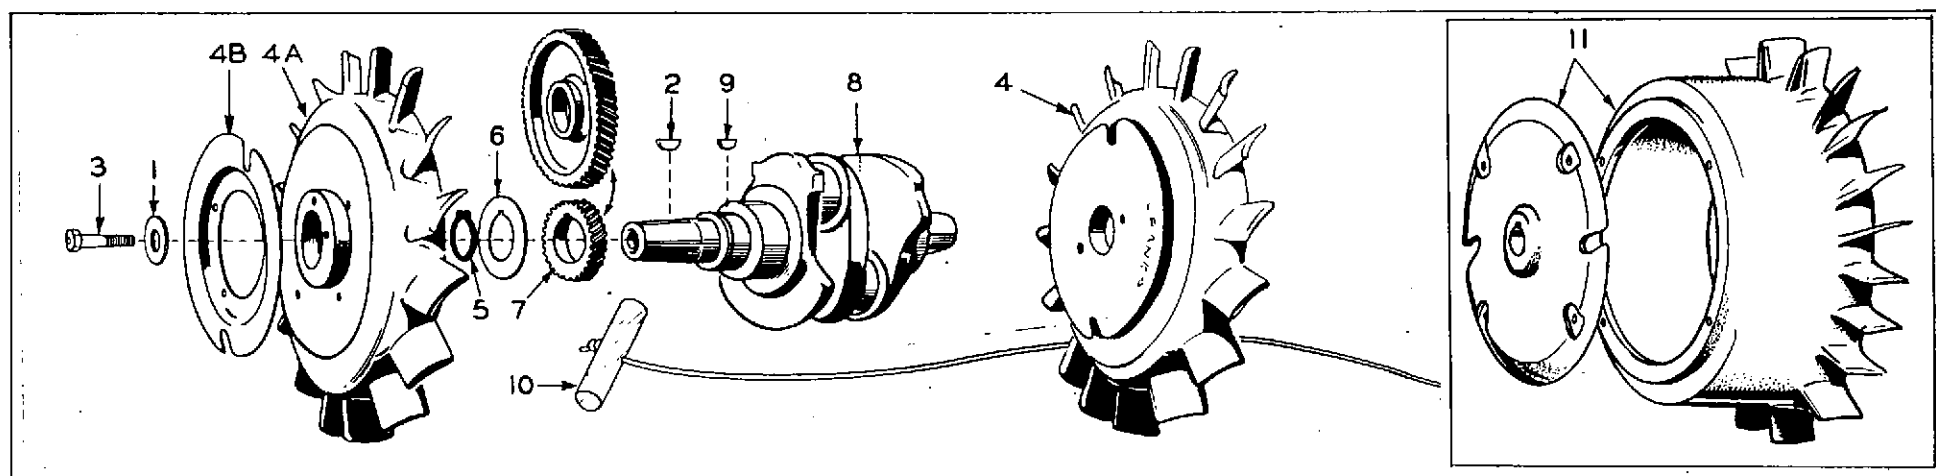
FIG. C - CRANKSHAFT & FLYWHEEL GROUP
